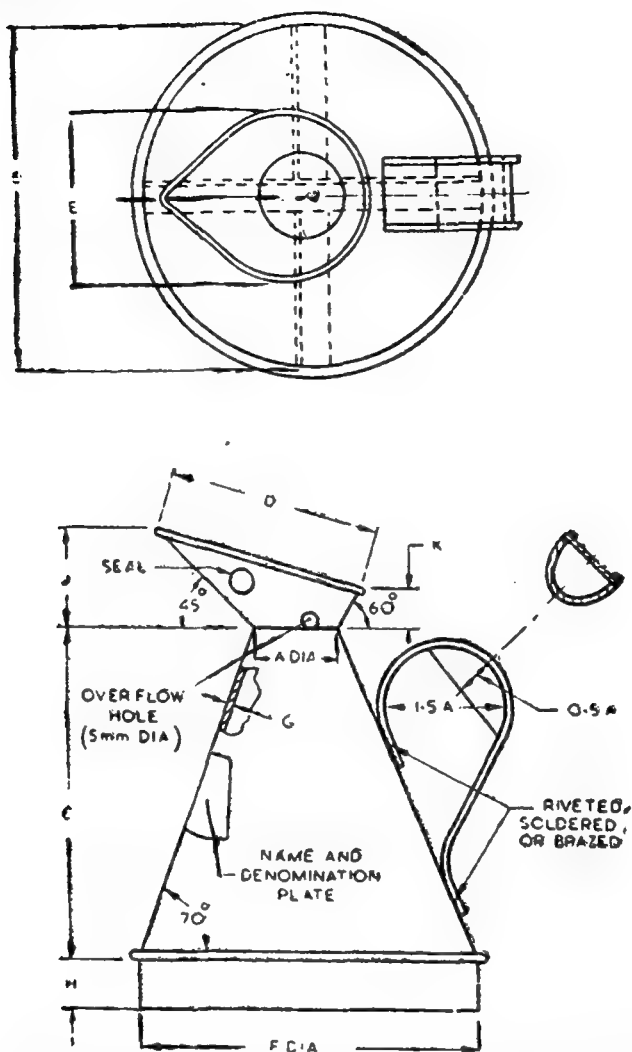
POURING TYPE CONICAL MEASURE (SCHEMATIC).
